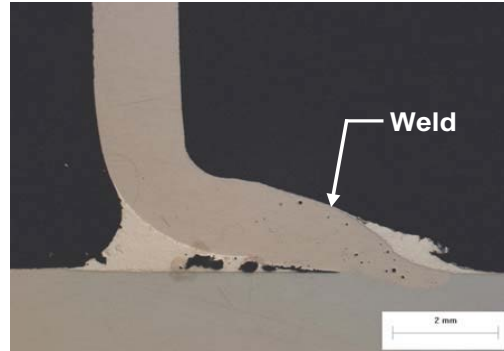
Assembly #4 Braze Joint Voids with Porosity in Adjacent Weld
